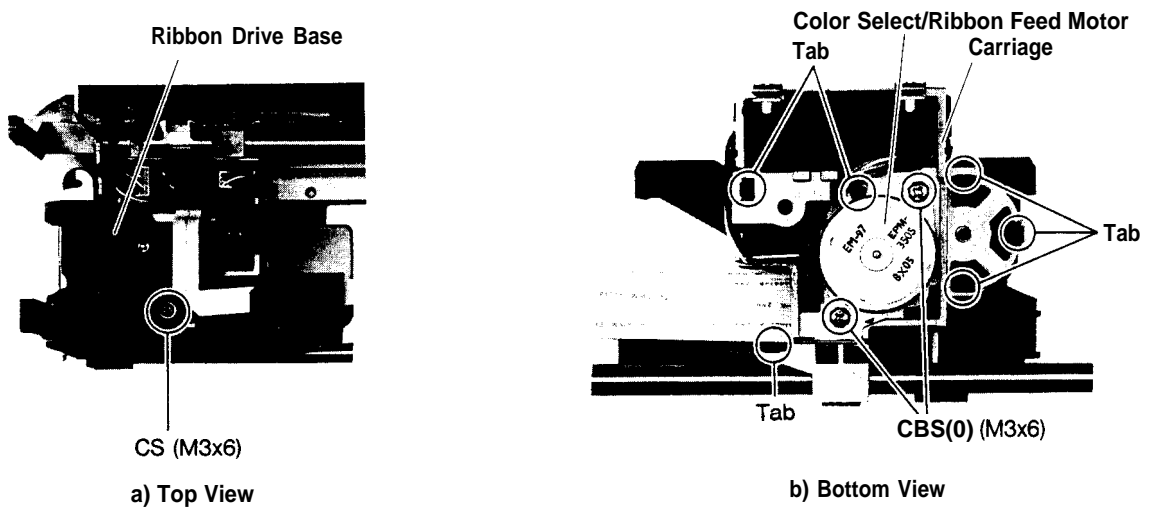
Ribbon Drive Base and Color Select/Ribbon Feed Motor Removal
